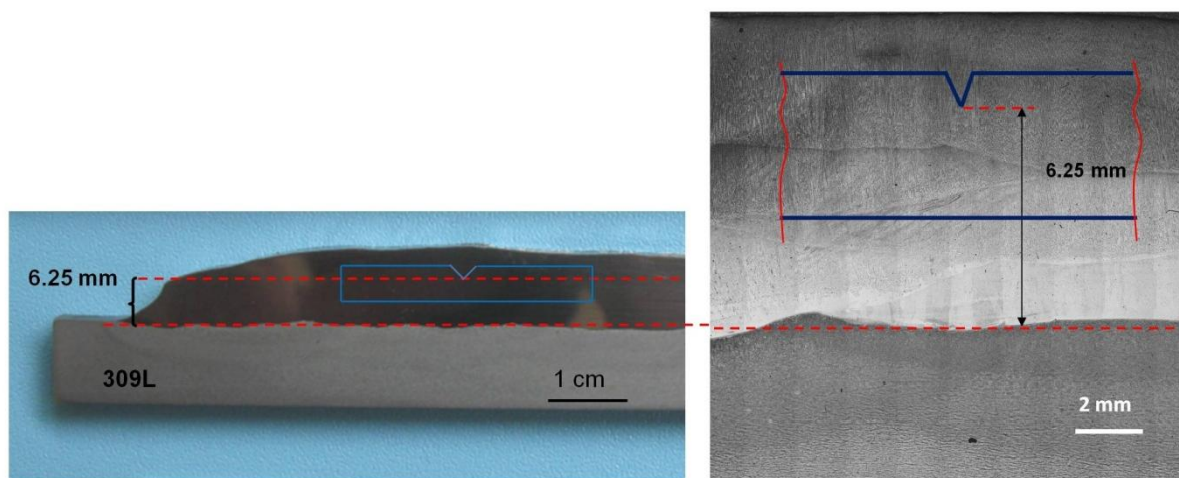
Location of Charpy samples in 309L stainless steel weld deposit
